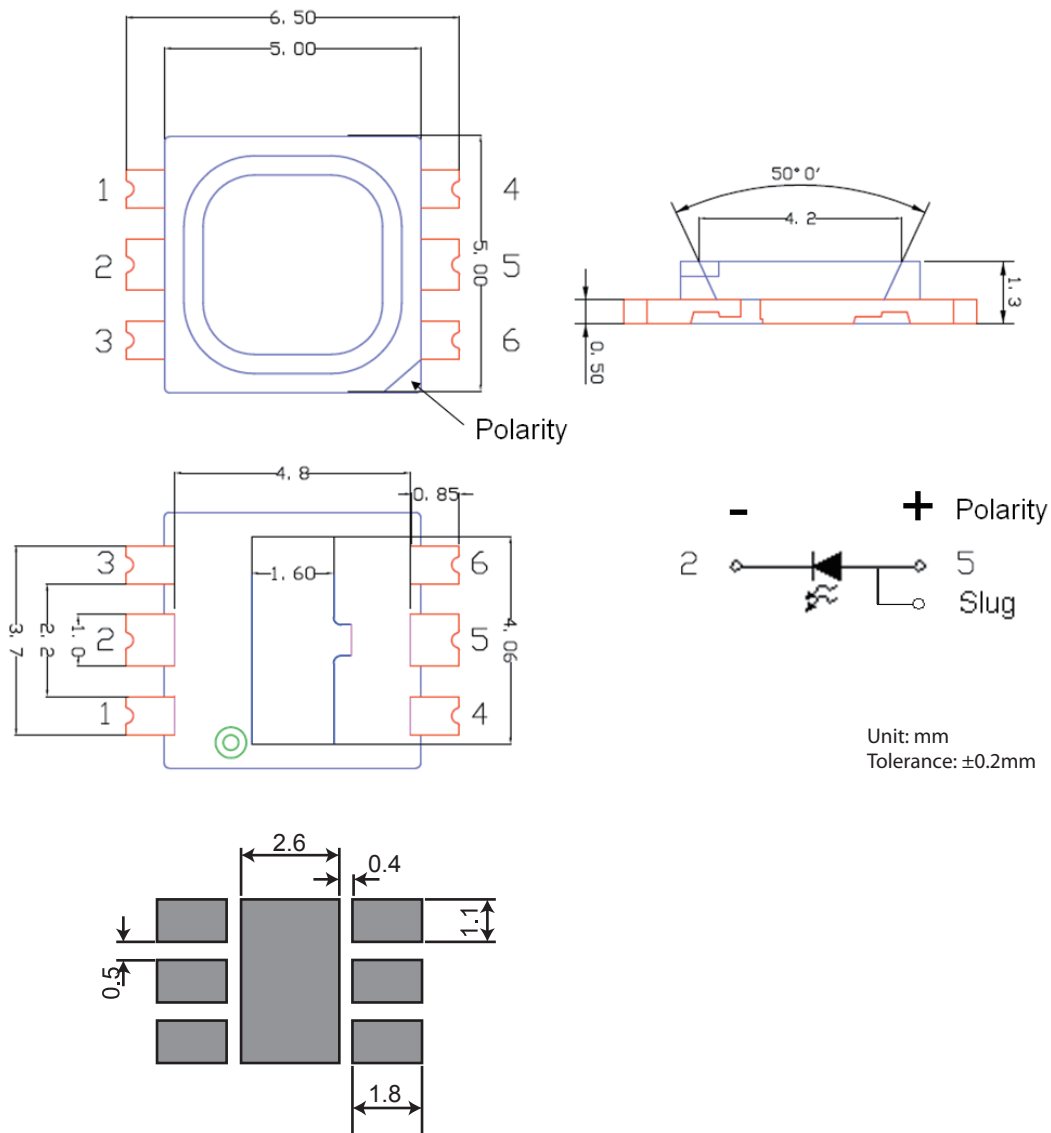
5050W PLCC dimension, circuit diagram and recommended soldering pad
